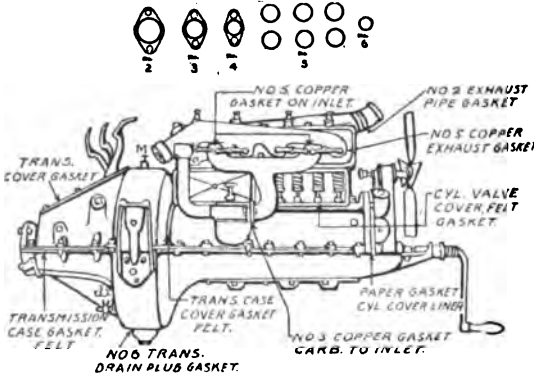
Right side of Ford engine showing different location and kinds of gaskets used.
